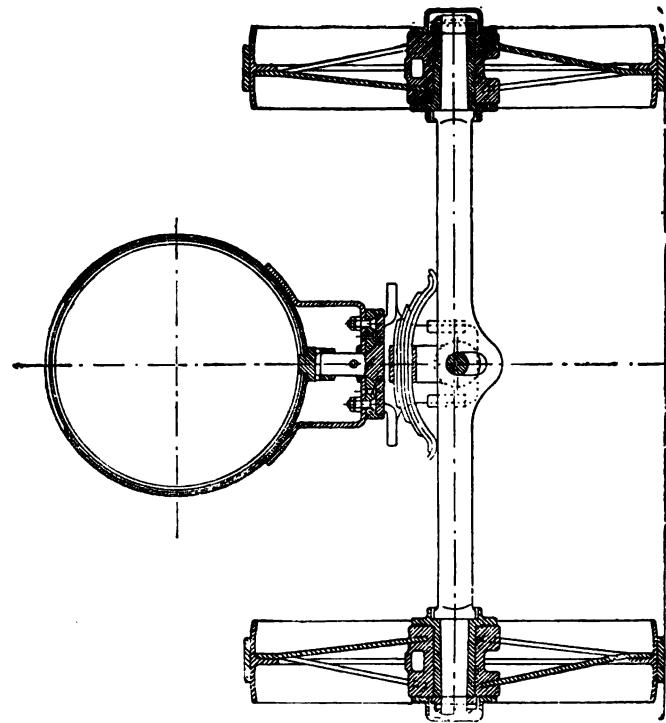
Section showing how Fowler Traction Engines rest on Springs.
